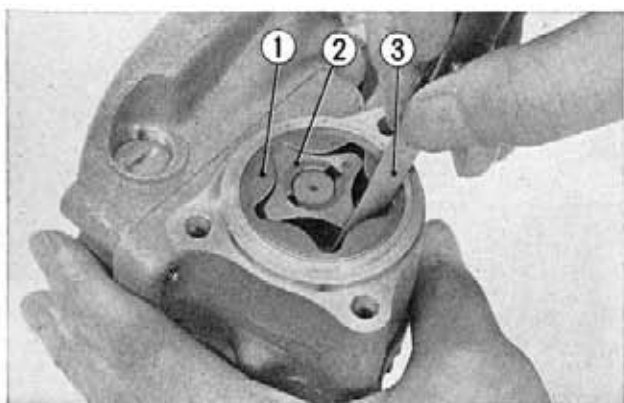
① Outer rotor ③ Thickness gauge
